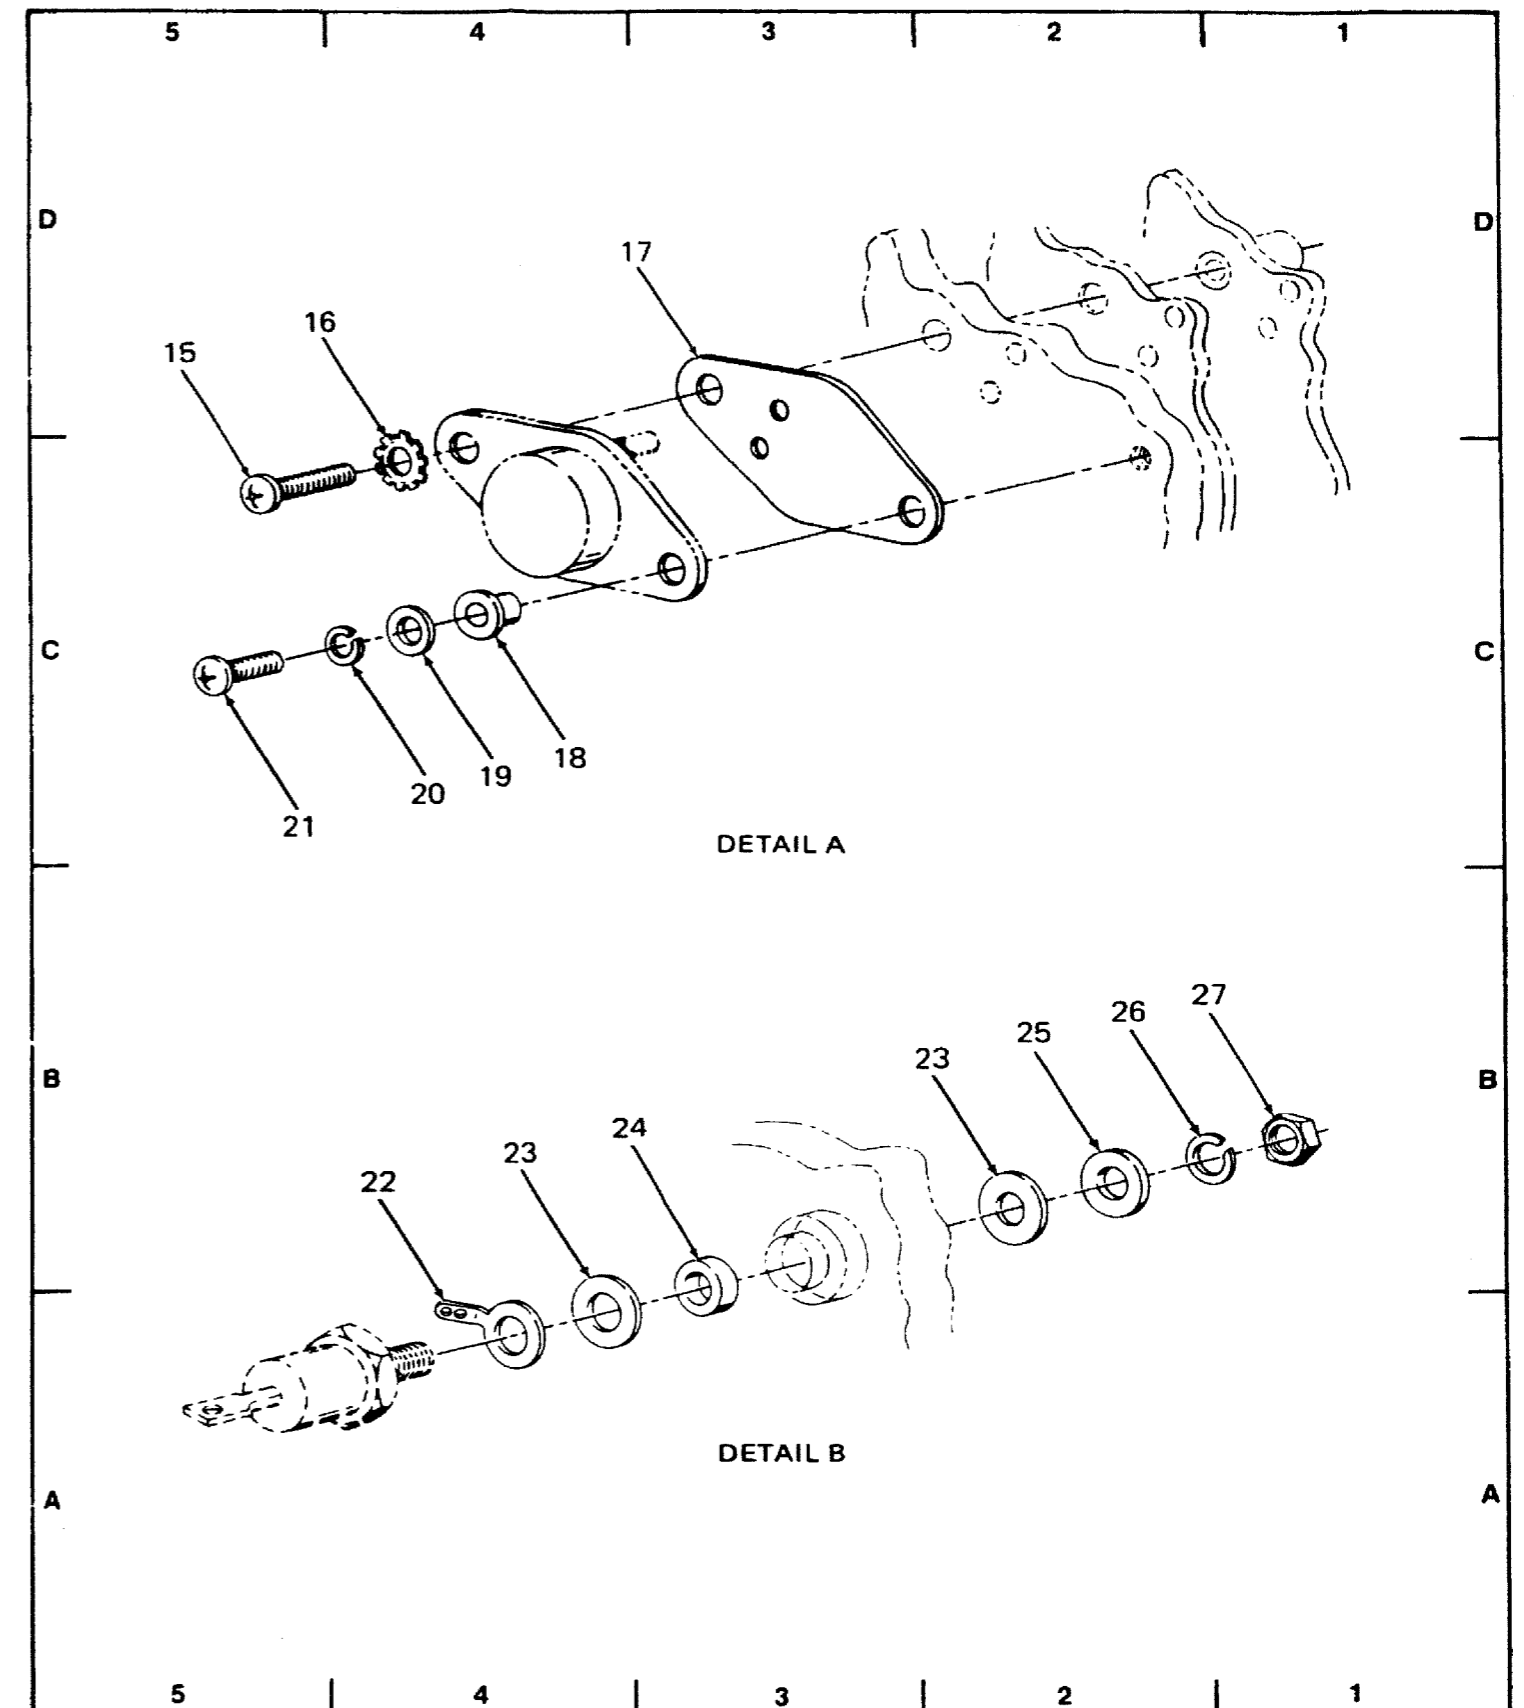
Power Supply Heat Sink Assembly (Sheet 2 of 4)
